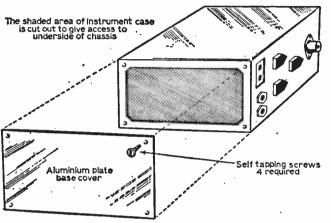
Showing how the base of the unit is modified to incorporate a cut-out inspection opening.
